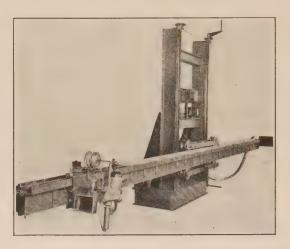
Complete Machine for Carbon Arc Welding
